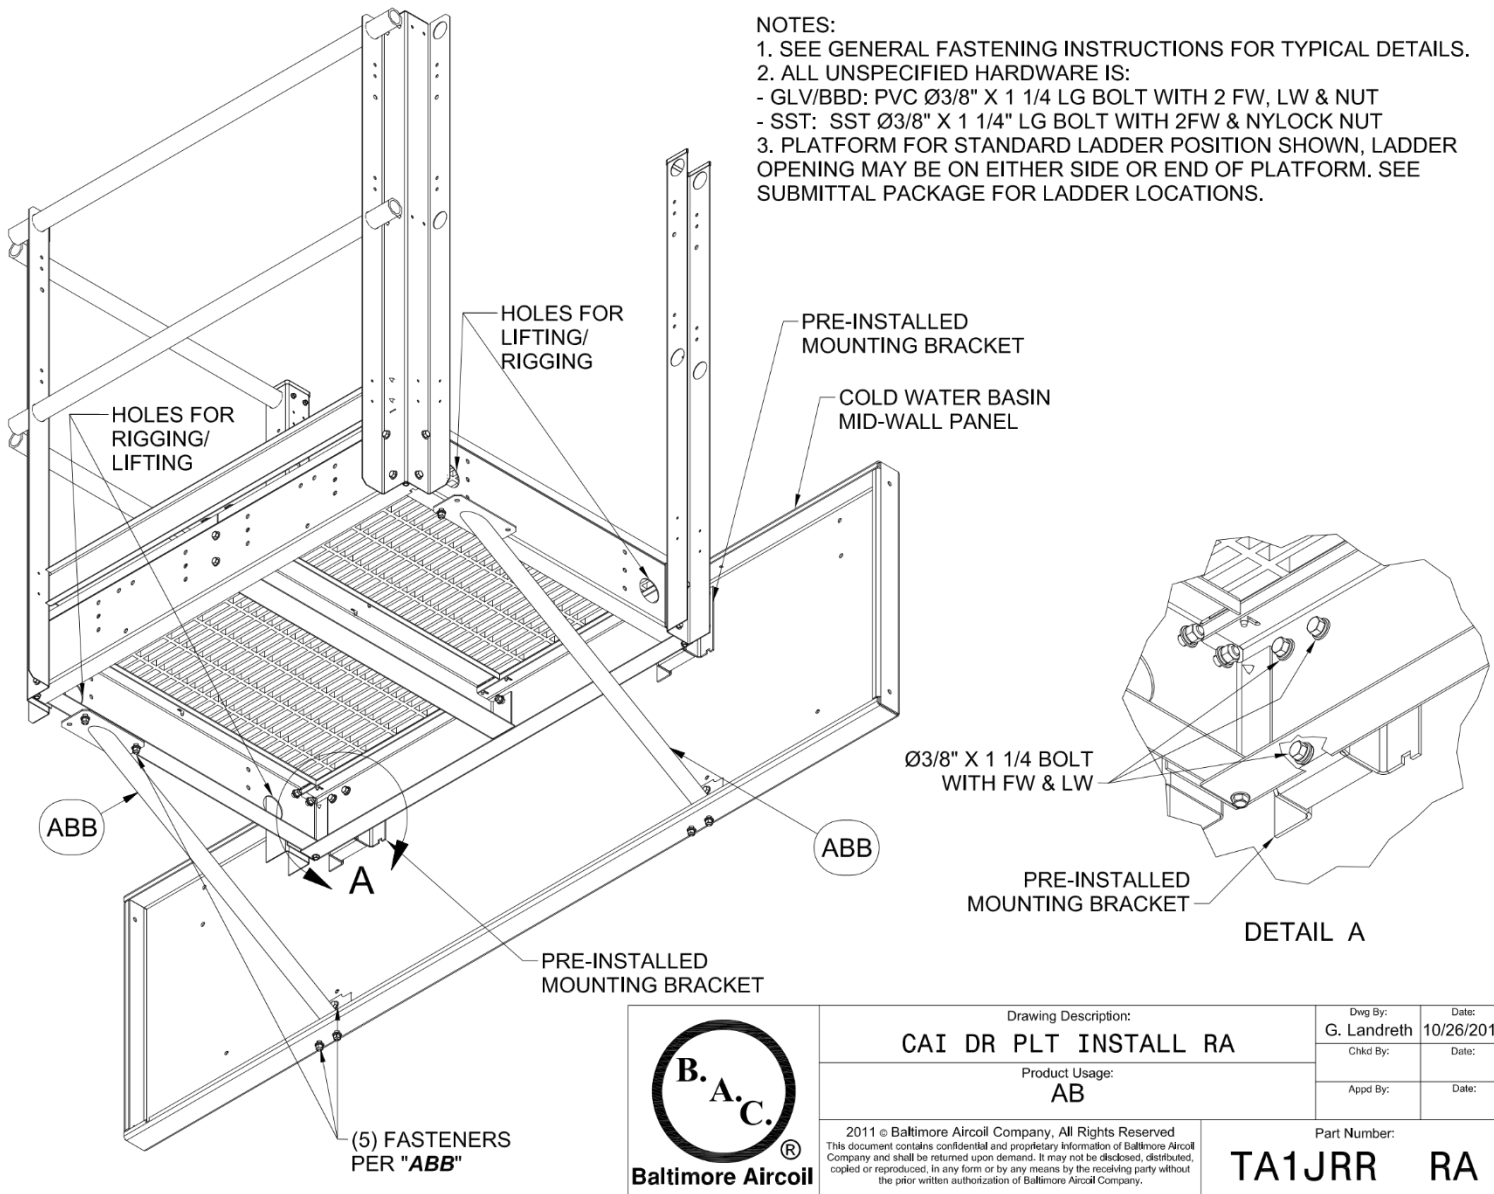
Access Door Platform Ladder Installation, Remote Sump
